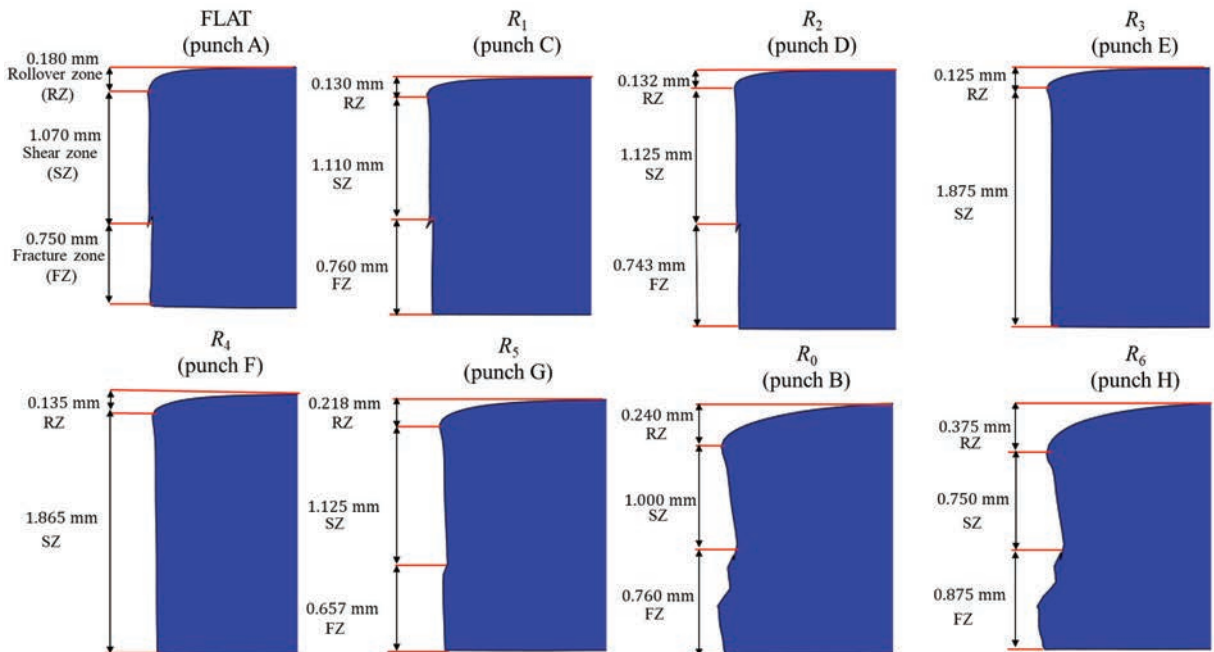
Deformed shapes of the workpiece material including the lengths of rollover, shear and fracture zones when it was cut with different punches
